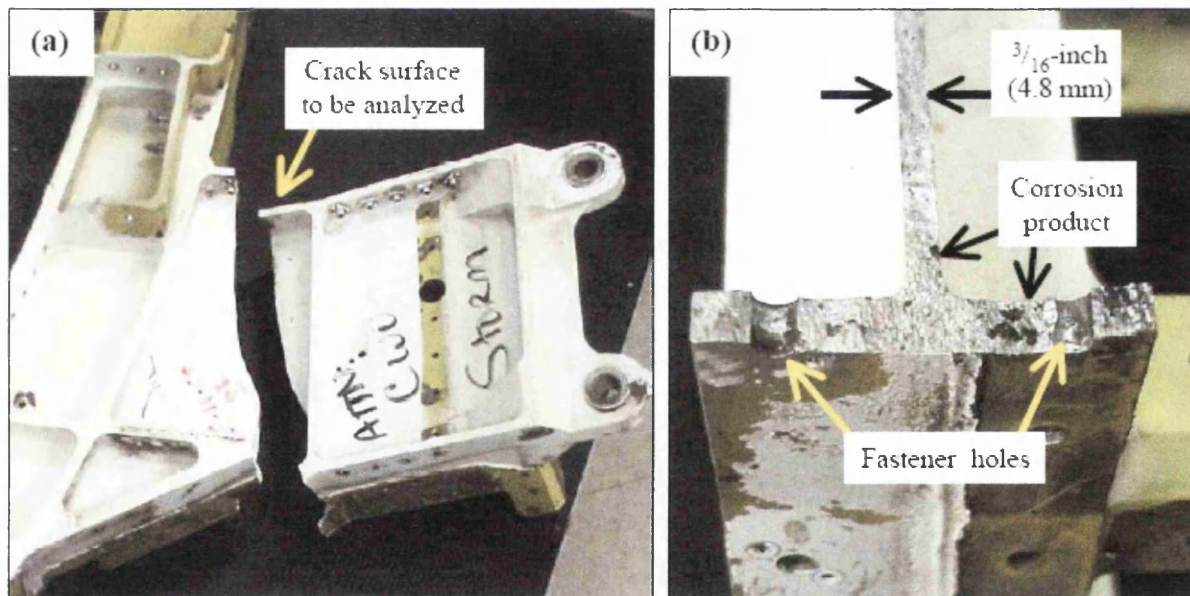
Photographs illustrating the location of the corrosion pitting within the external pylon-mounted fuel-tank.
